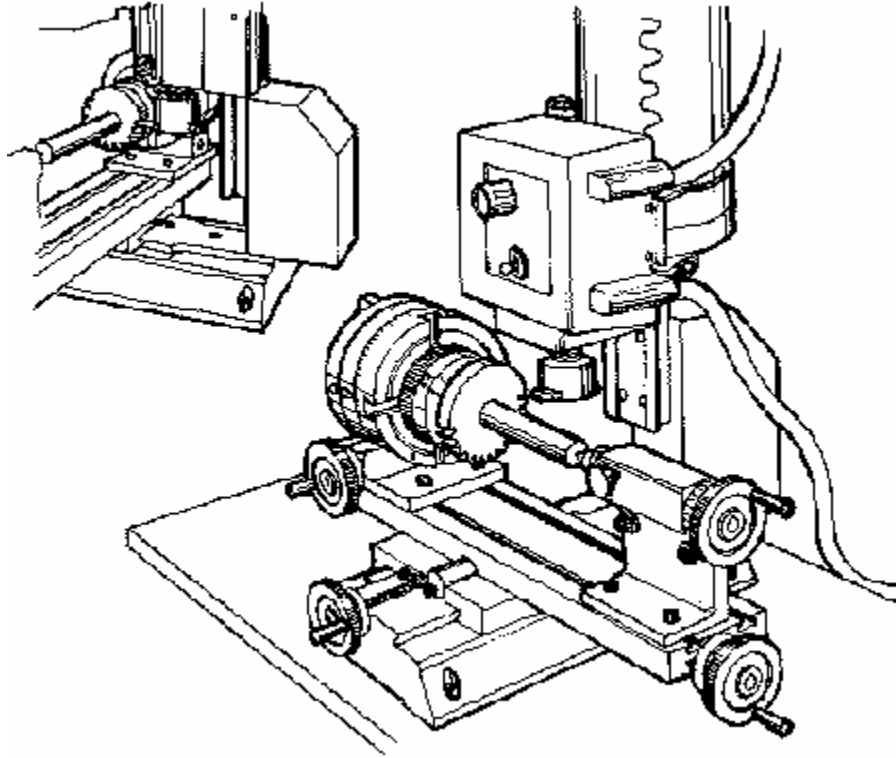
A sample setup for cutting a large gear showing the Adjustable Right Angle Tailstock in place.
